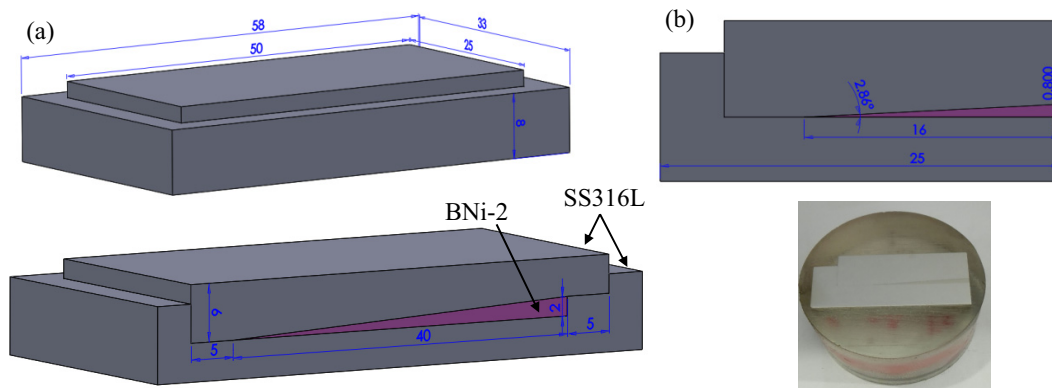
(a) The schematic of the new wedge-shape specimen (mm); (b) the wedge-shaped joint (mm).
